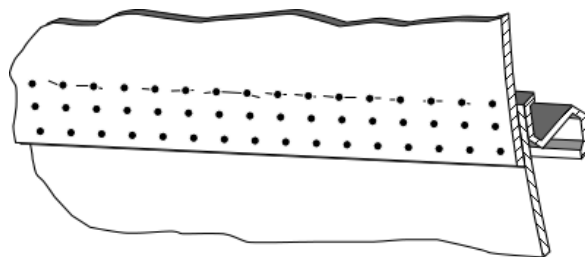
Illustration of multi-site damage in a riveted lap joint.
